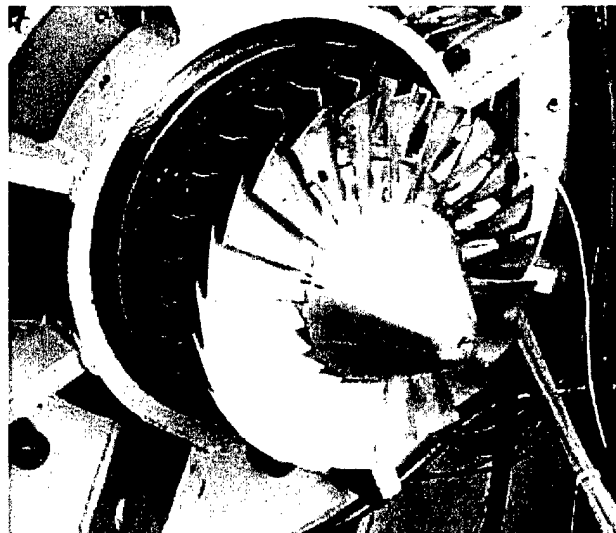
Rotor-Stator Assembly Prior to Casewall Installation
